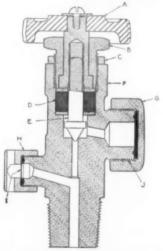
Packed type Artic cylinder valves. Parts are: Acontrol handle; B-packing nut; C-jam nut; D-packing; Evalve stem; F-valve body; Goutlet cap; H-safety disc cap; I-safety disc; and J-nozzle.
